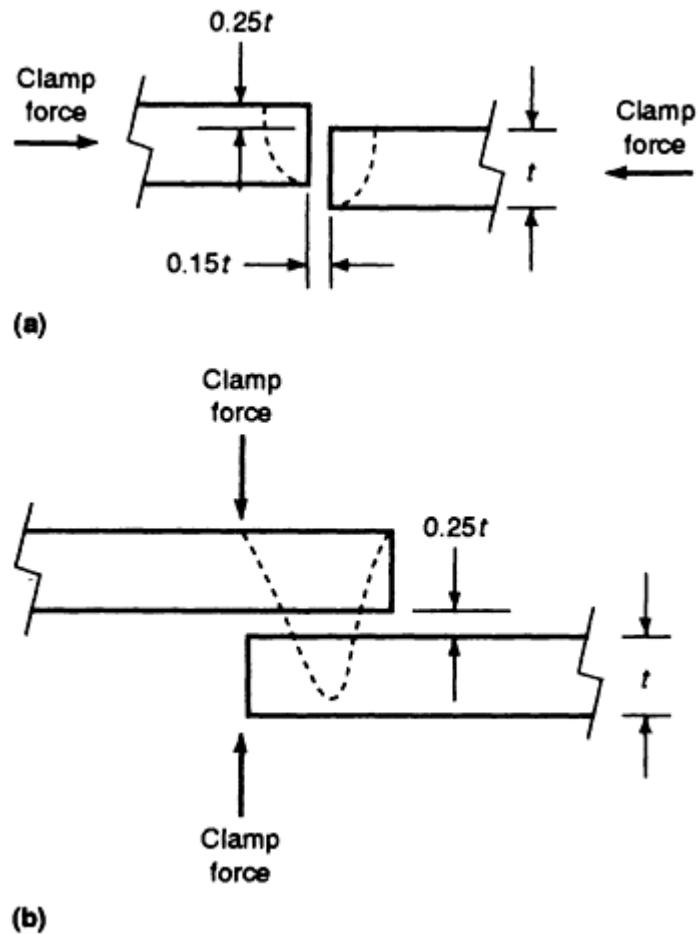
CLAMPING AND TOLERANCES FOR A BUTT JOINT (A) AND A LAP JOINT (B). DIMENSIONS ARE IN UNITS OF PERCENT OF MATERIAL THICKNESS T . SOURCE: REF 25
